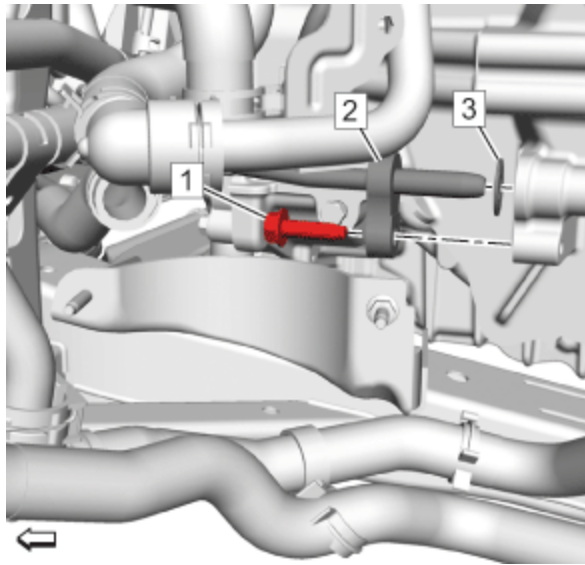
Transmission Fluid Cooler Outlet Pipe, Bolt And Sealing Washer
